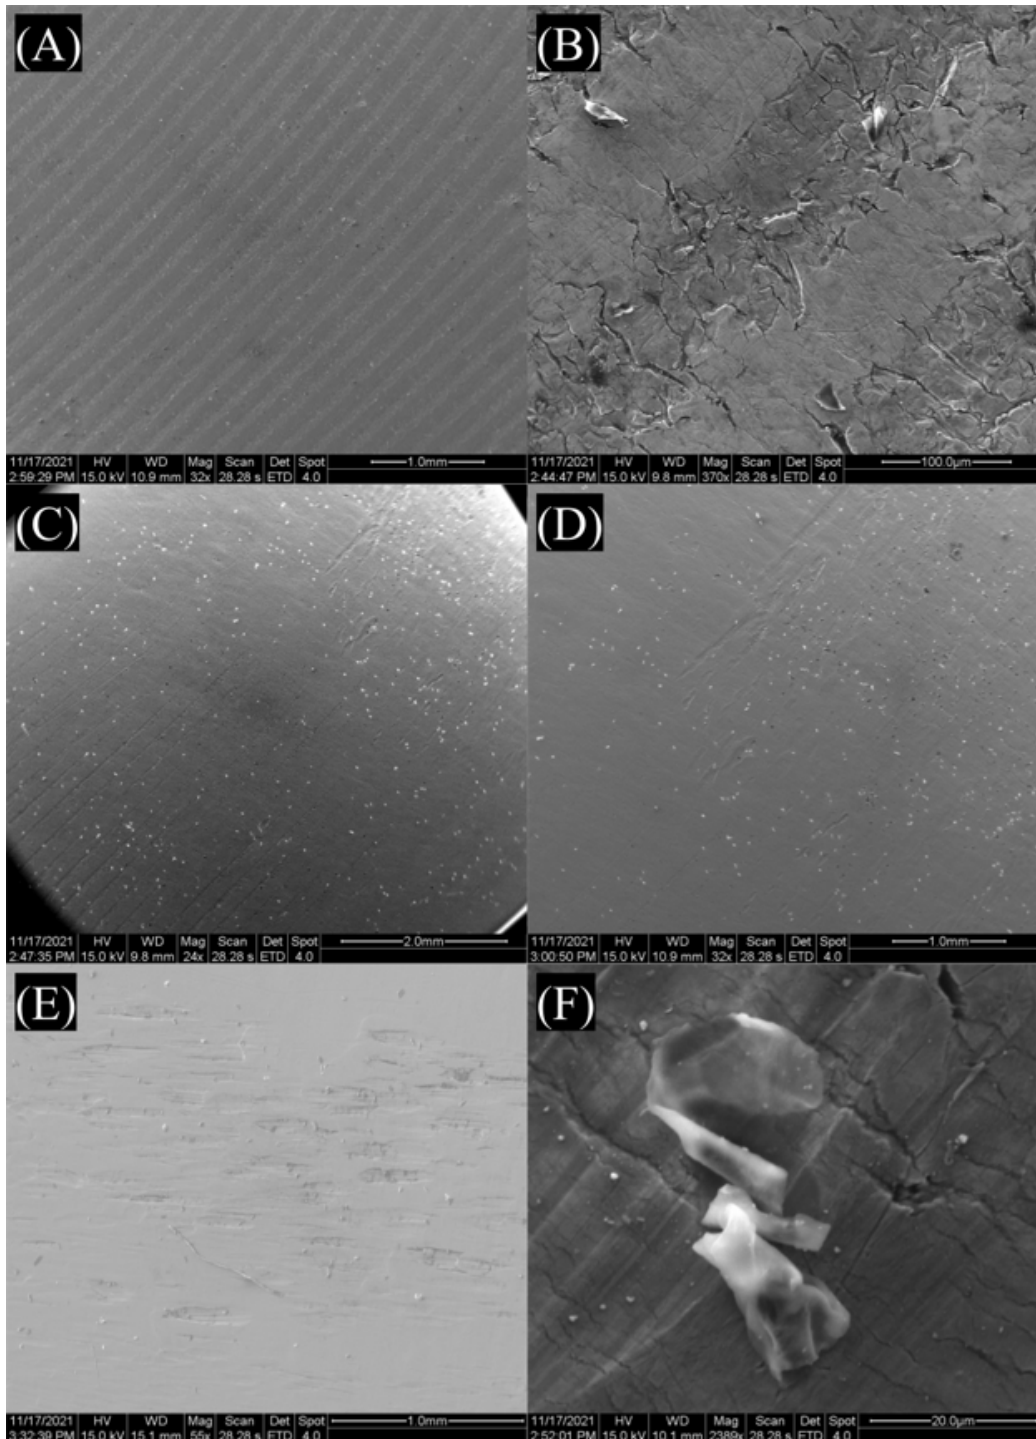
Scanning electron micrographs of the smaller split connecting rod piece. (A) This is how the surface is supposed to look, clear machining lines. (B) A closer look at machining lines. (C) The transition between a machined surface and a worn smoother surface. (D) The smooth almost polished surface is due to wear scatter with unknown bright particles. (E) Visible gouging and scraping are observed. (F) A magnified view of the bright particles on the surface.
